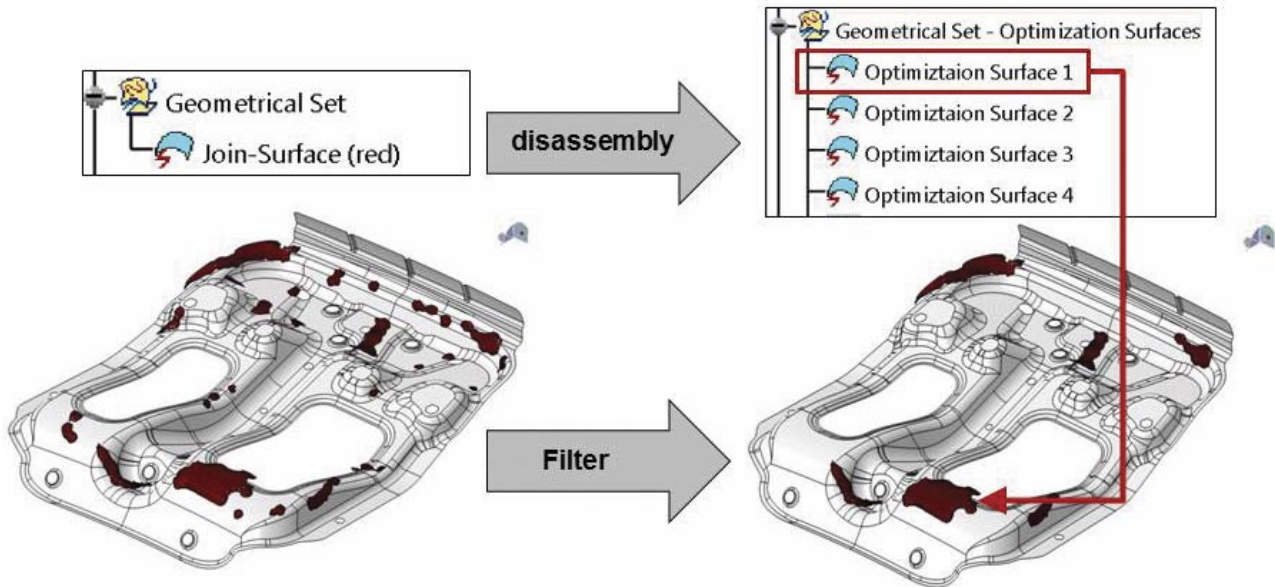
Disassembly and filtering of the join surface with a CATIA® Macro
